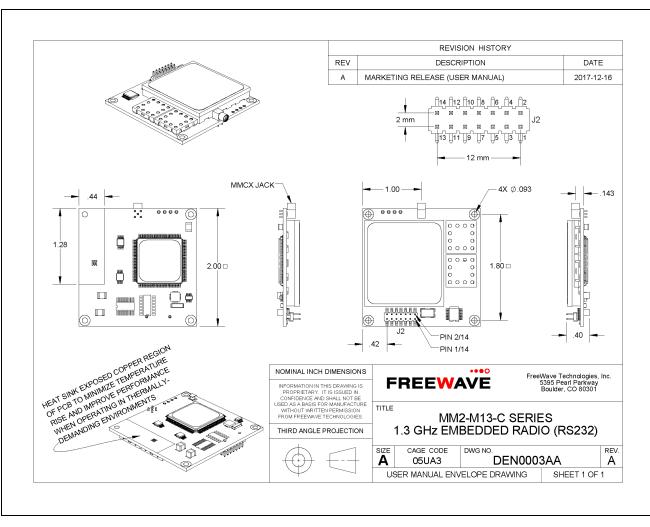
MM2-M13-C and -LV-C Mechanical Drawing
